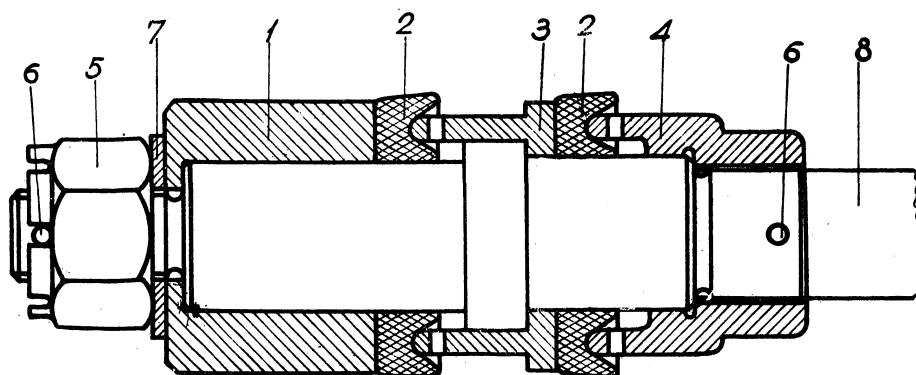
RECUPERATOR PISTON — ASSEMBLY
